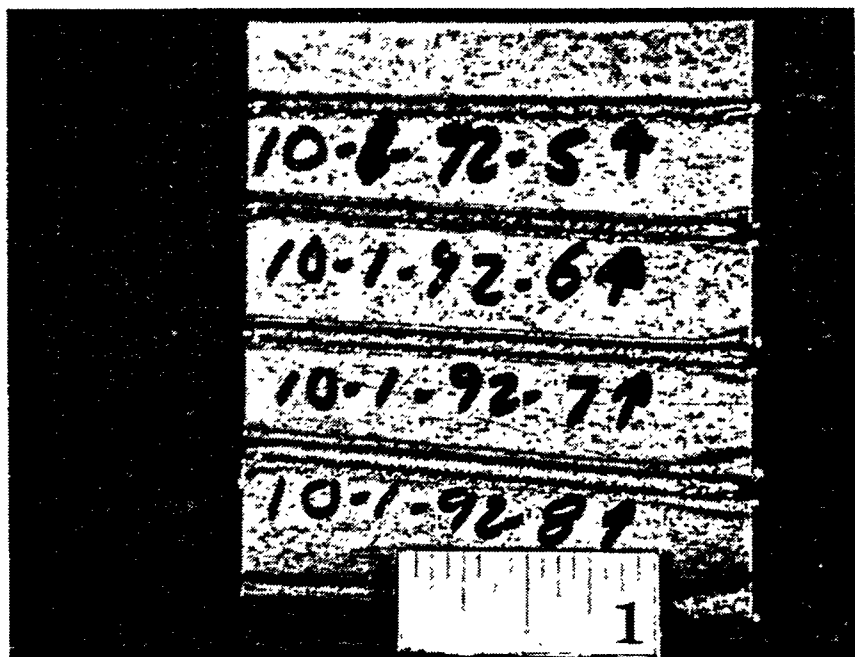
Cold Rolled Steel 0.125 in. Thick Samples 10-1-92-5, 6, 7, 8
